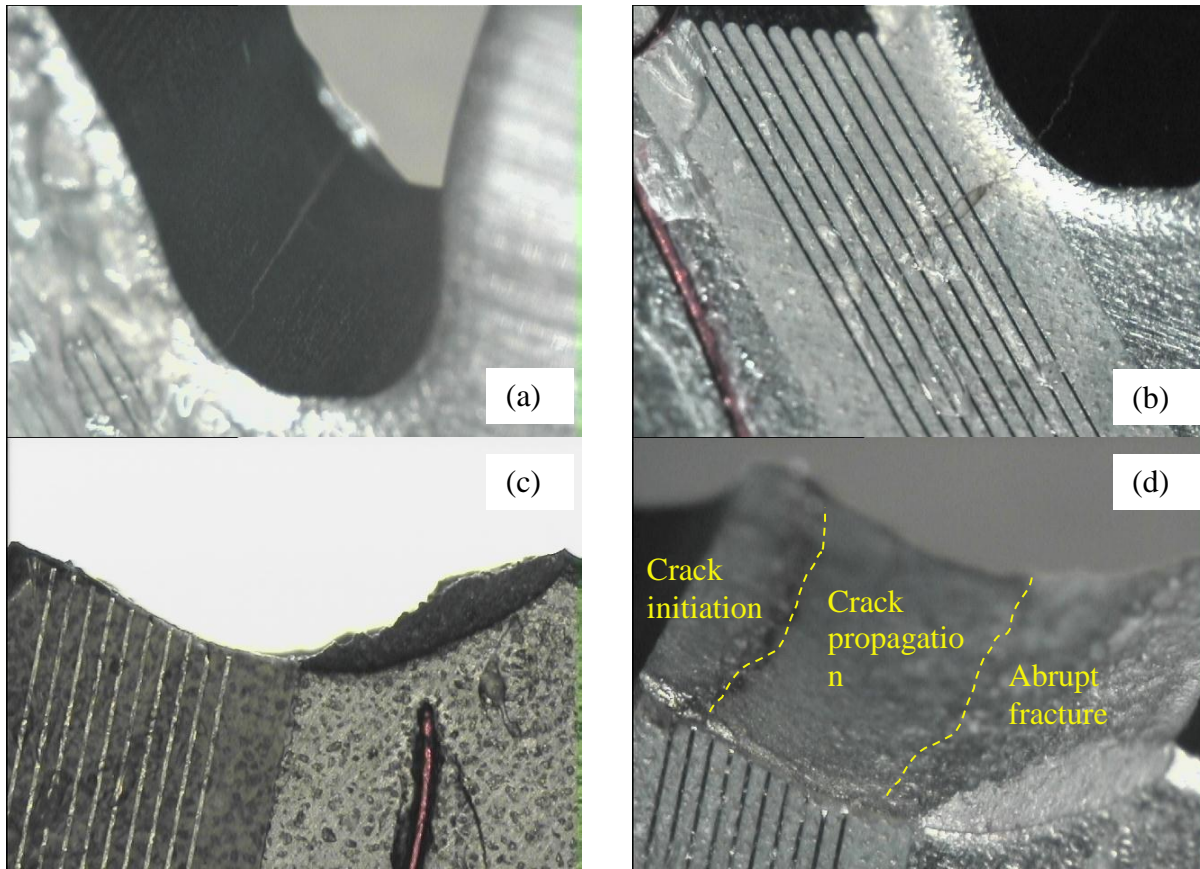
Images of failed tooth (a) crack initiation (b) crack propagation – the crack propagate through all the crack propagation sensor on both sides (c) broken off tooth (d) image of the crack surface
